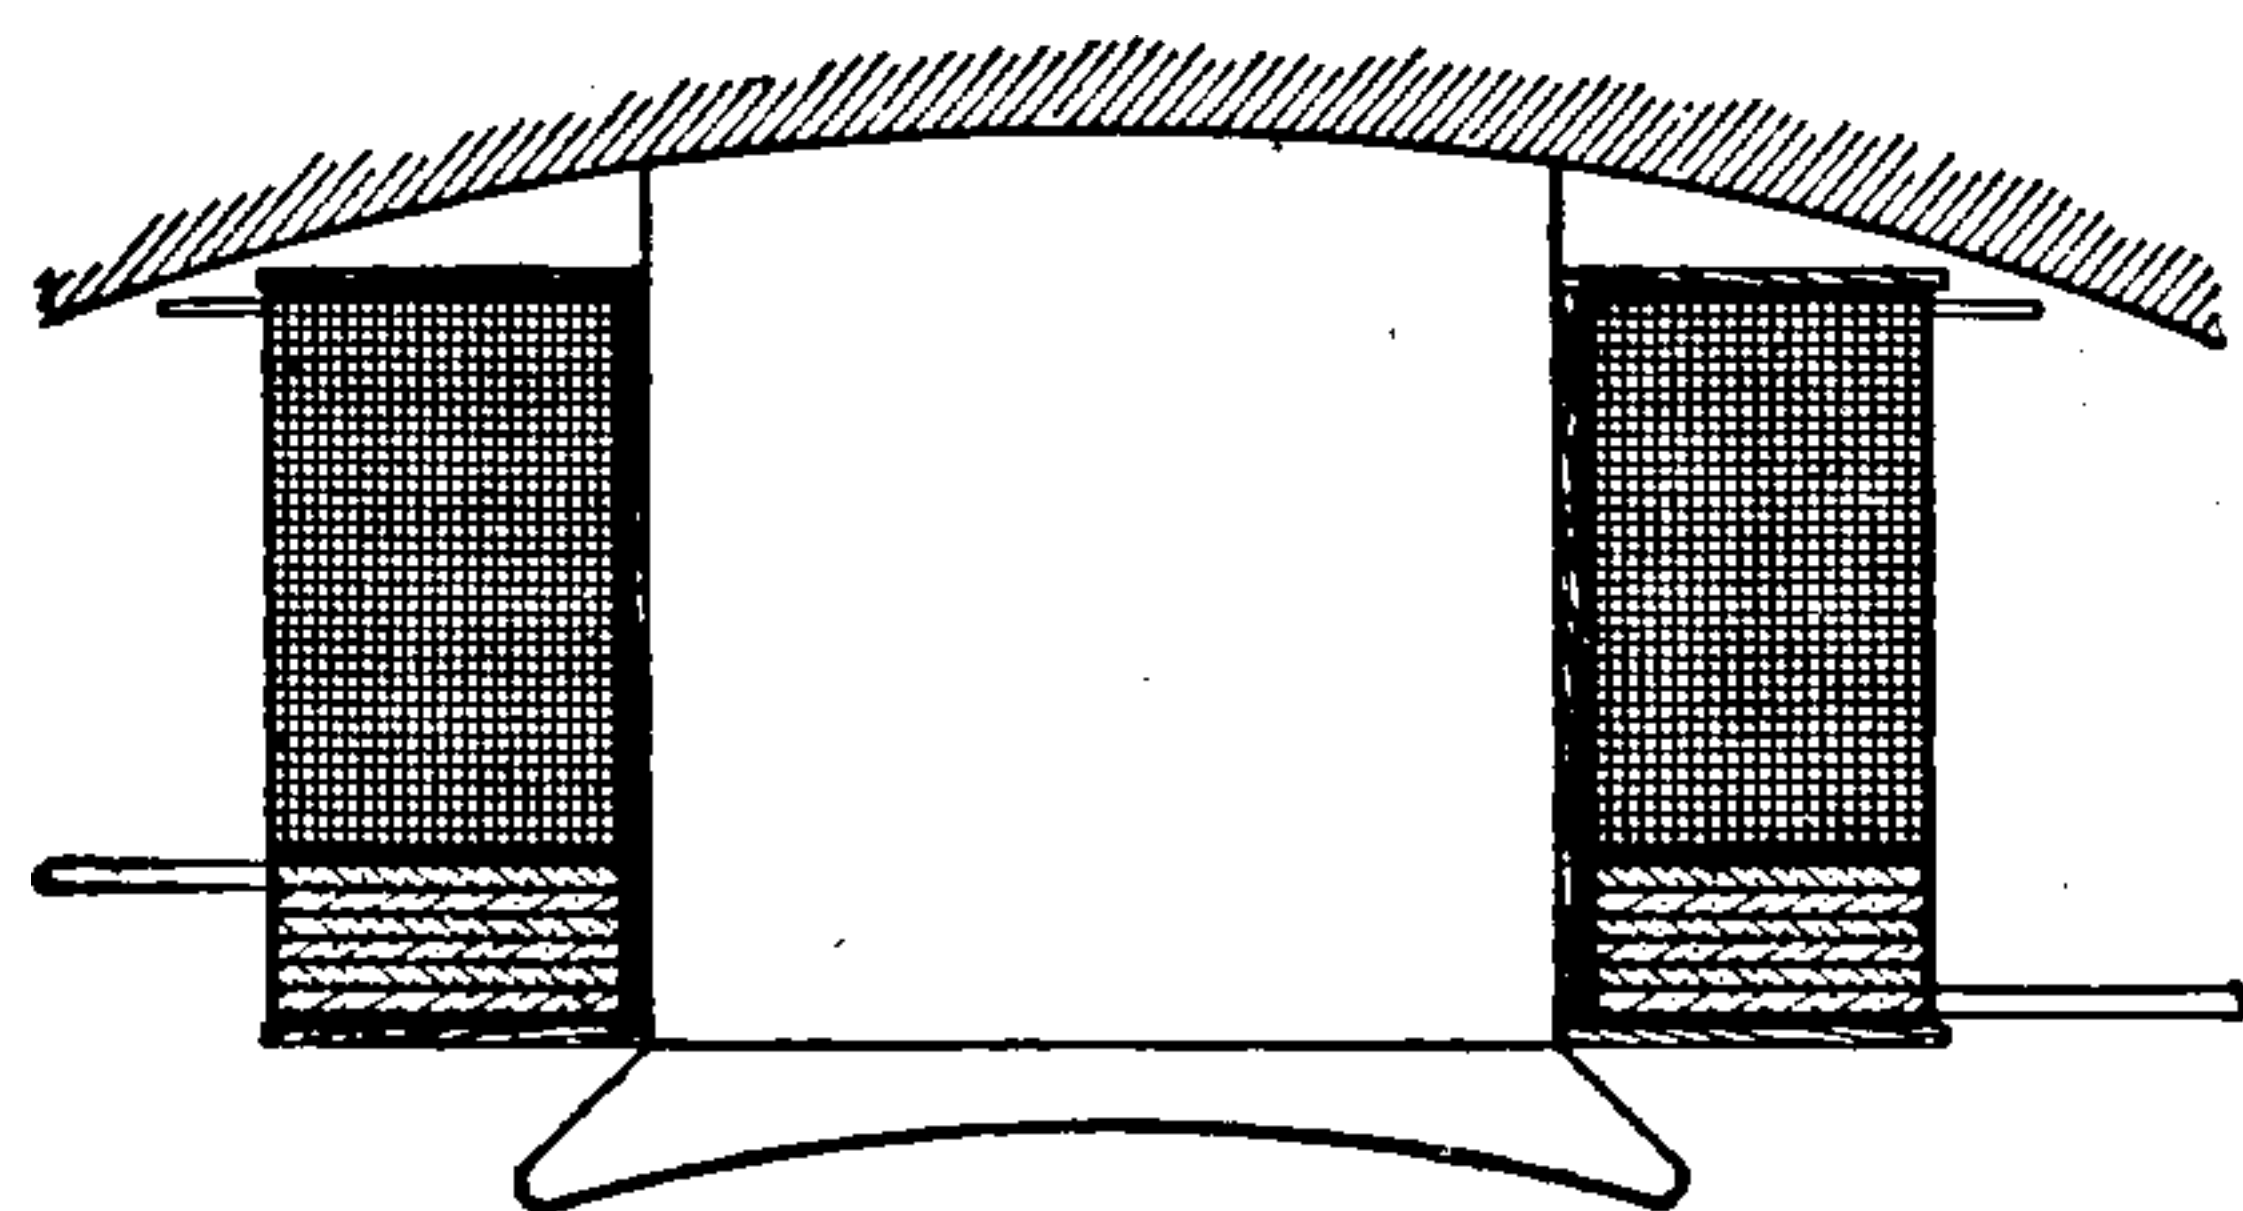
Field-Magnet Bobbins with Hardwood Flanges
